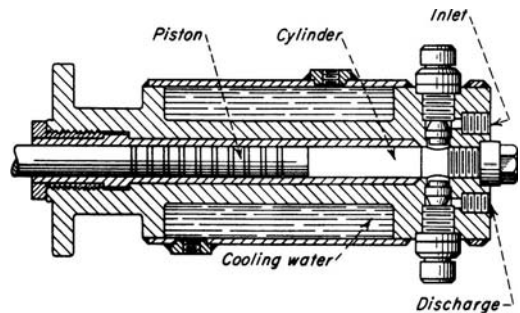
Forged-steel single-acting high-pressure cylinder.
